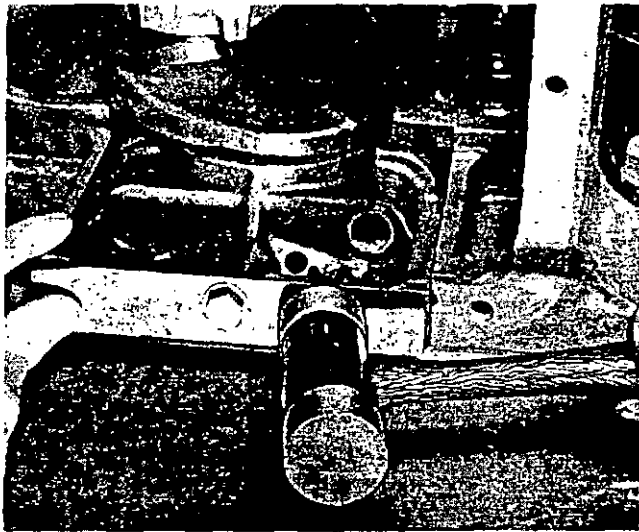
Reassembling Rear Oil Seal (HD, JD)
